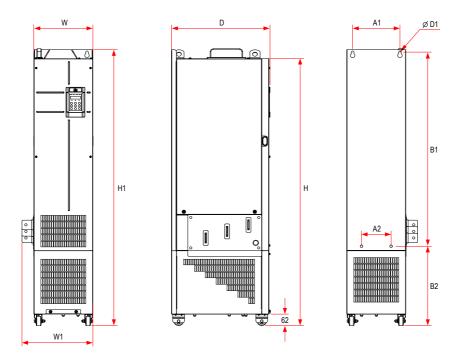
Mounting dimensions of MD500ET200G-L to MD500ET450G-L (with reactor base)
